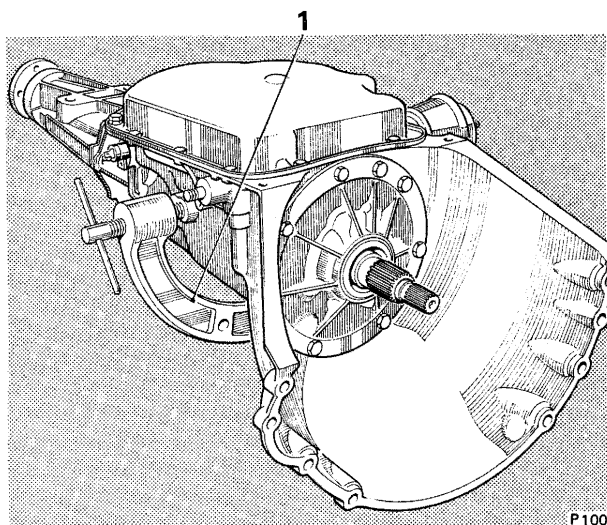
TRANSMISSION IN HOLDING FIXTURE
